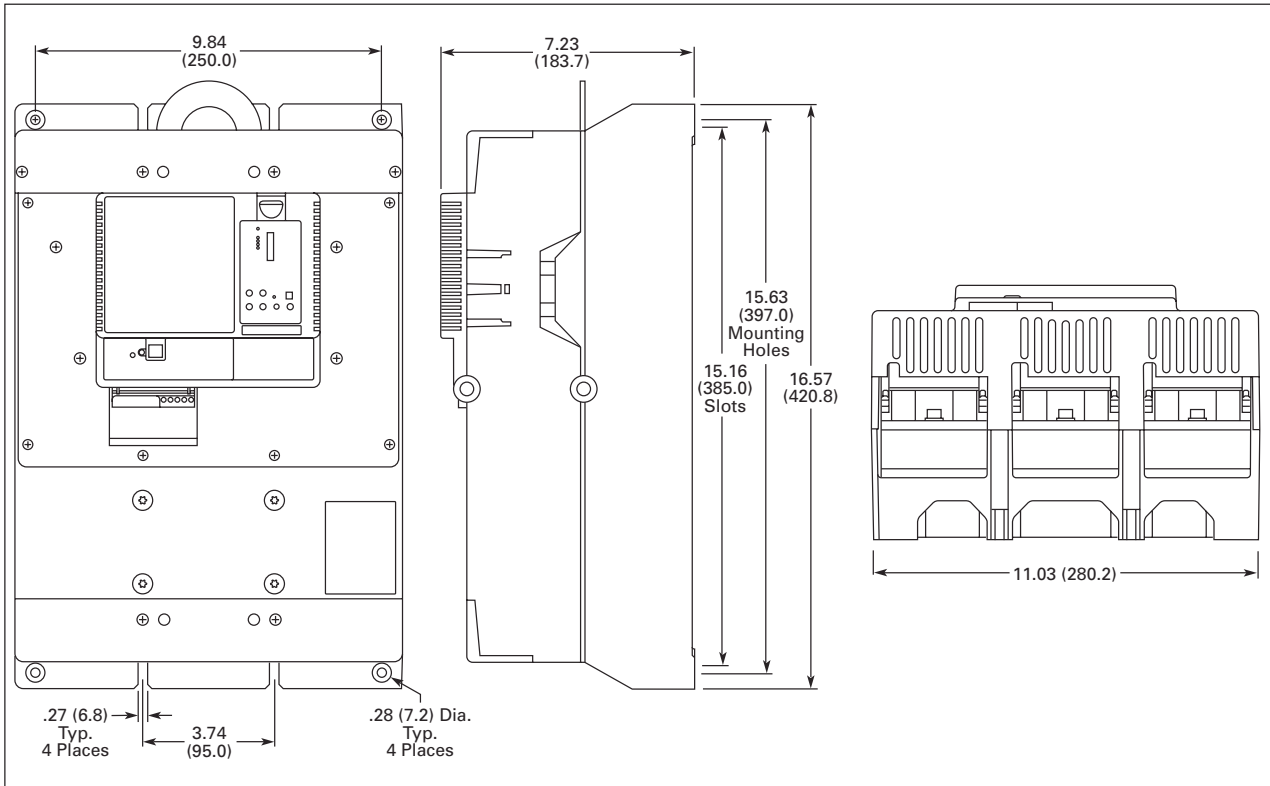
V-Frame (290 mm) S801 Approximate Dimensions in Inches (mm)
